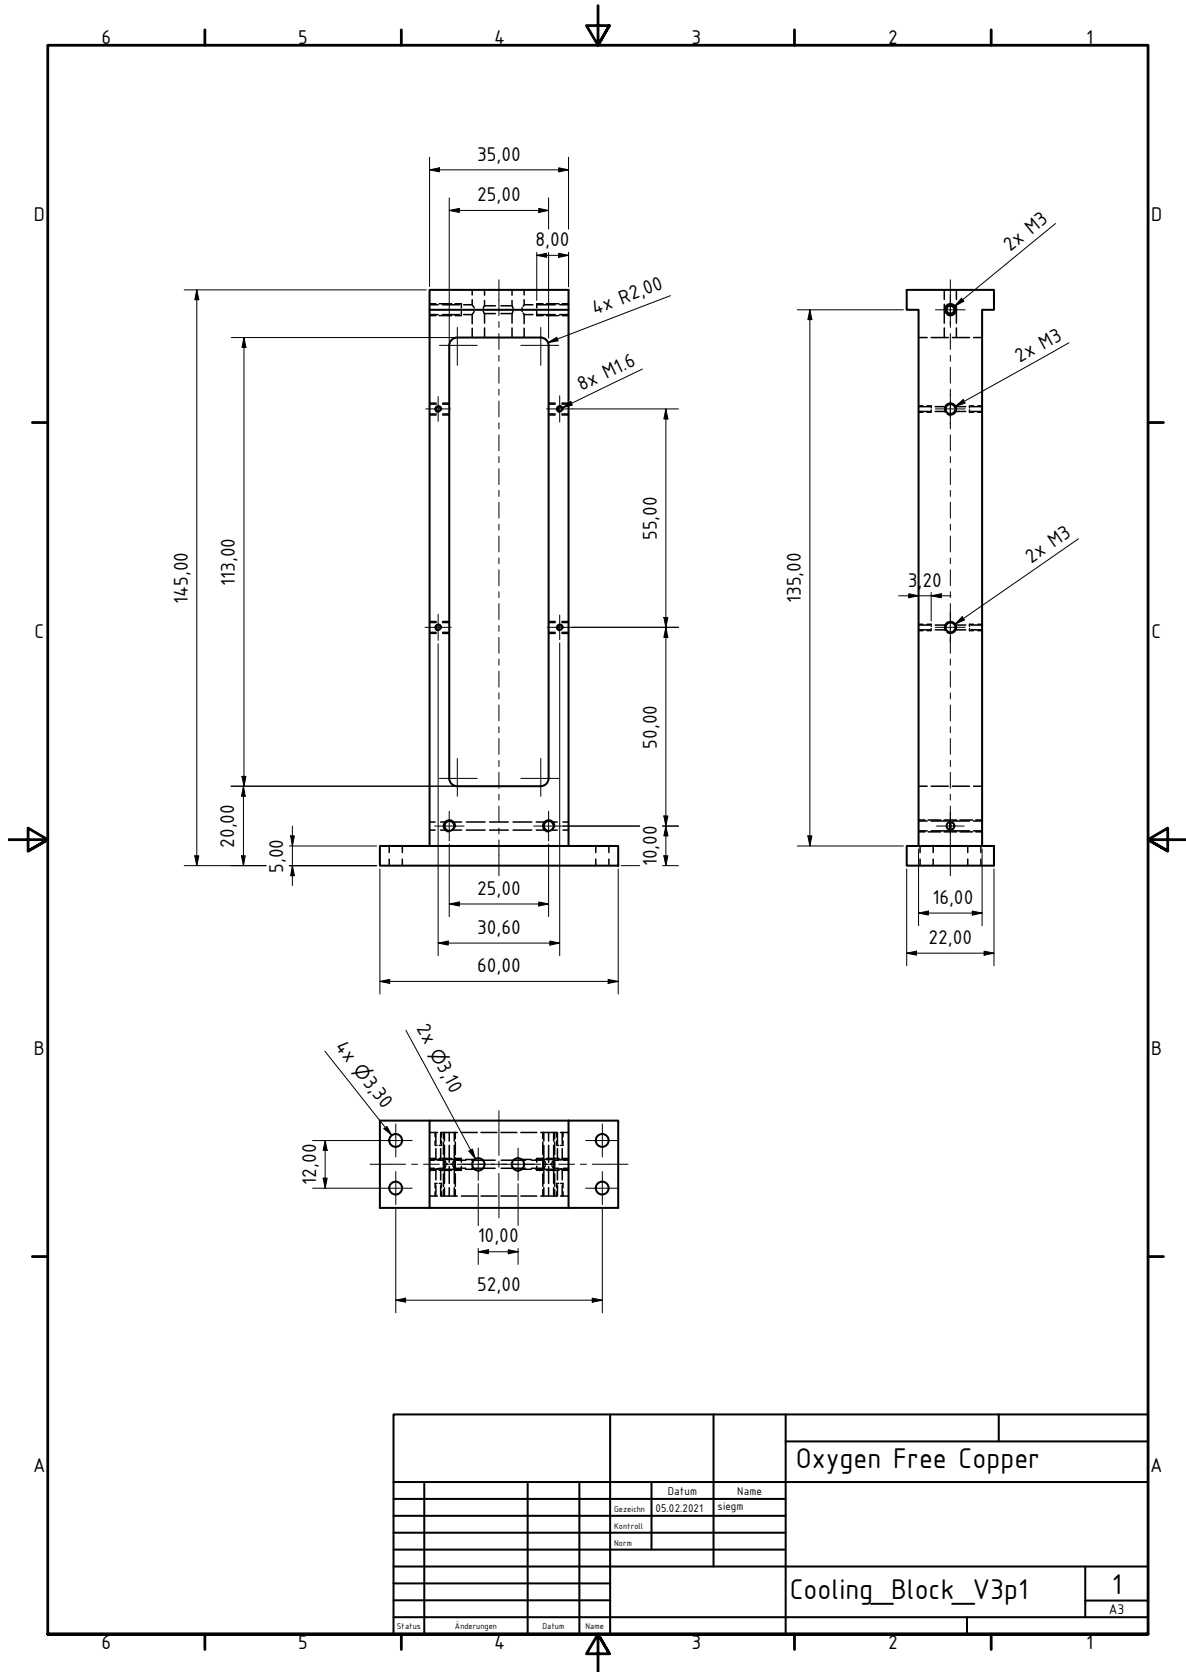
Detector module mechanical drawing - Copper cooling structure hollow part
